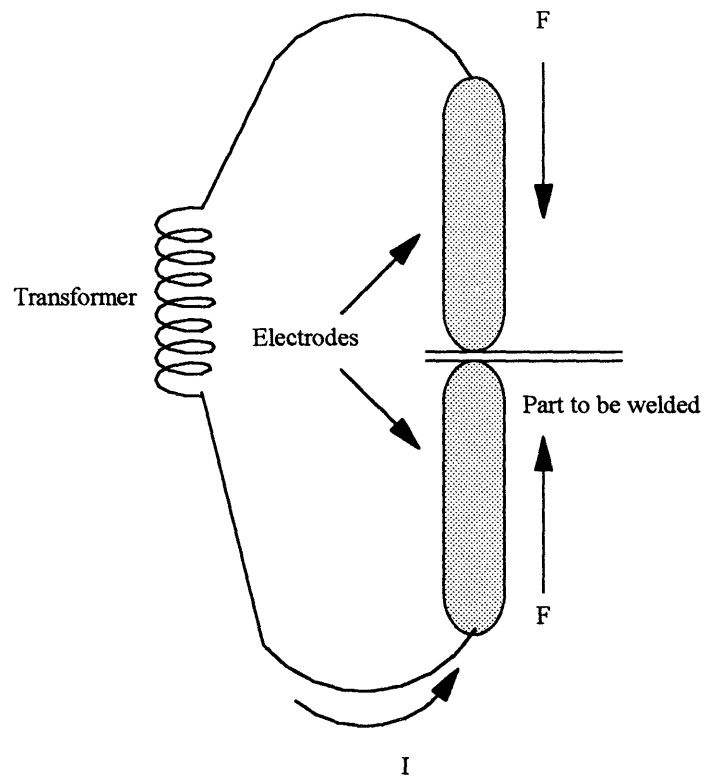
Part is Clamped and Current Flows to Perform Weld
